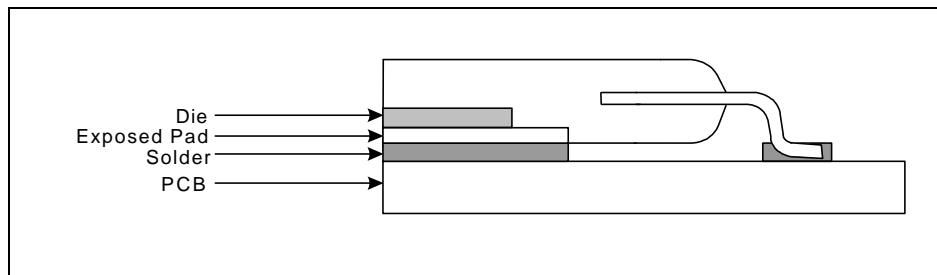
Cross-section of the LQFP and QFN exposed pad package
